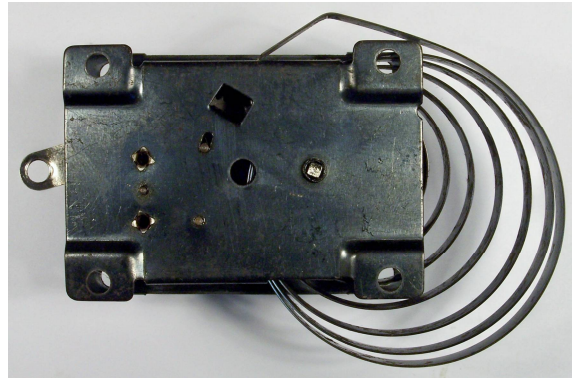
A Meccano Magic motor with fully unwound mainspring. Hole for hook at side of casing. Mainspring width 7 mm.
